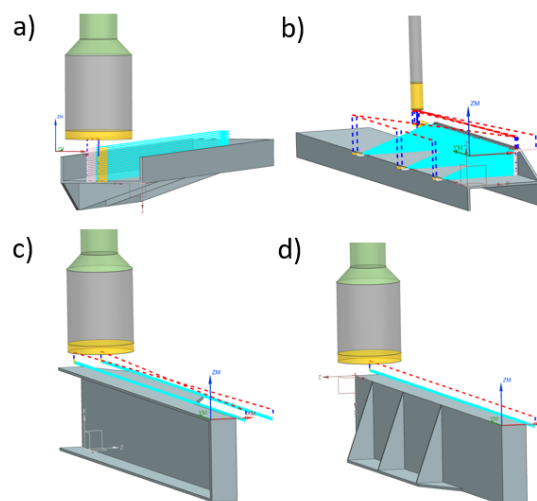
a) Setup 1: open pocket side machining; b) Setup 2: Triangle-ribbed side machining; c) Setup 3: small lateral side machining; d) Setup 4: large lateral side machining.
